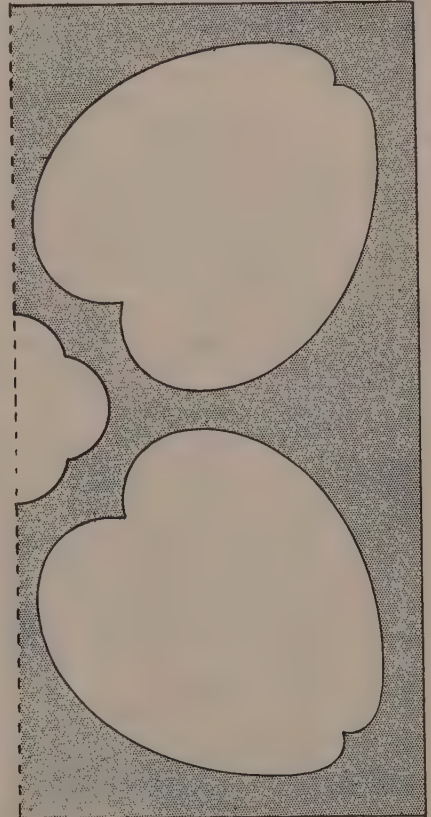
HALF FULL-SIZE DIAGRAM OF DOOR OVERLAY.
